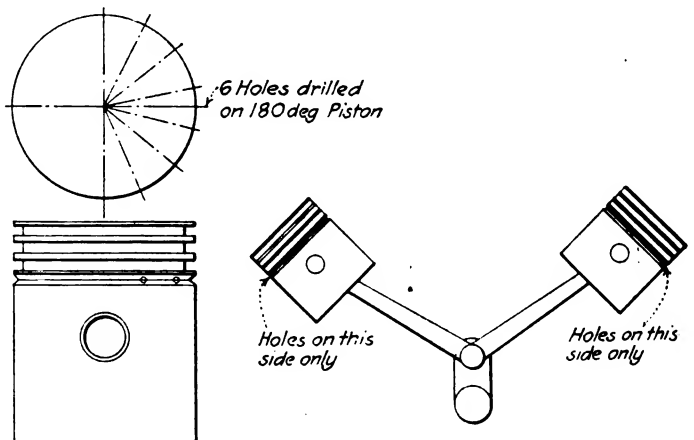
DRAWING SHOWING THE LOCATION OF OIL HOLES ON A V-TYPE ENGINE
